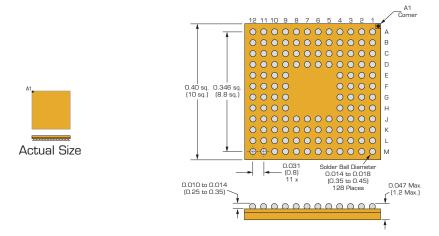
M3001 TFBGA-128 Dimensions, BGA Bottom View.
